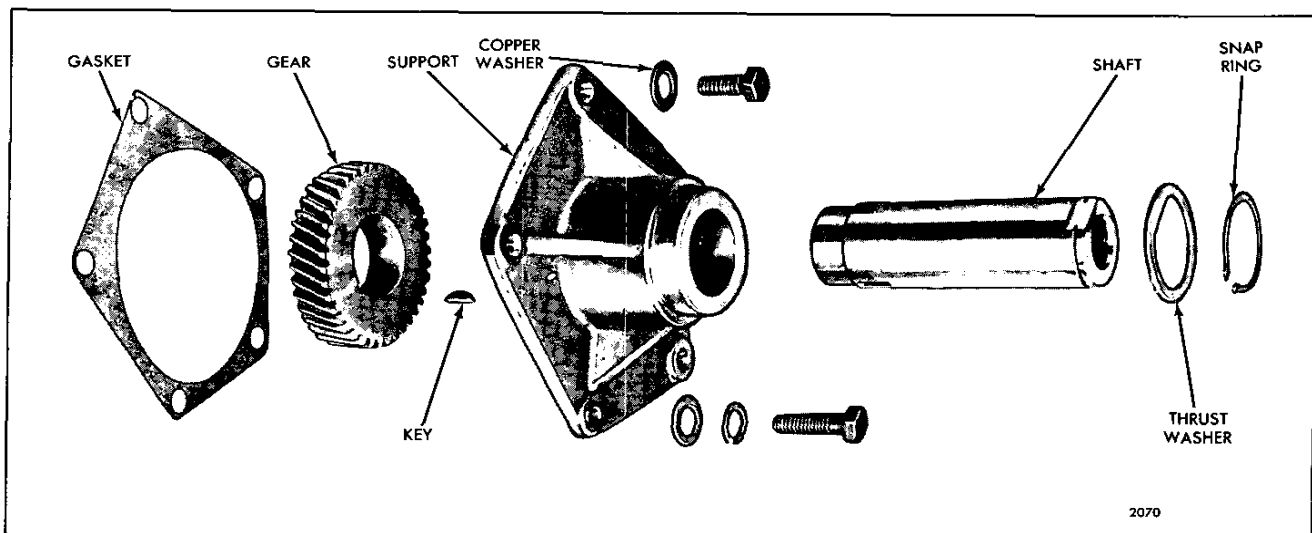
Blower Drive Gear and Support Assembly Details and Relative Location of Parts (In-line Engine)
